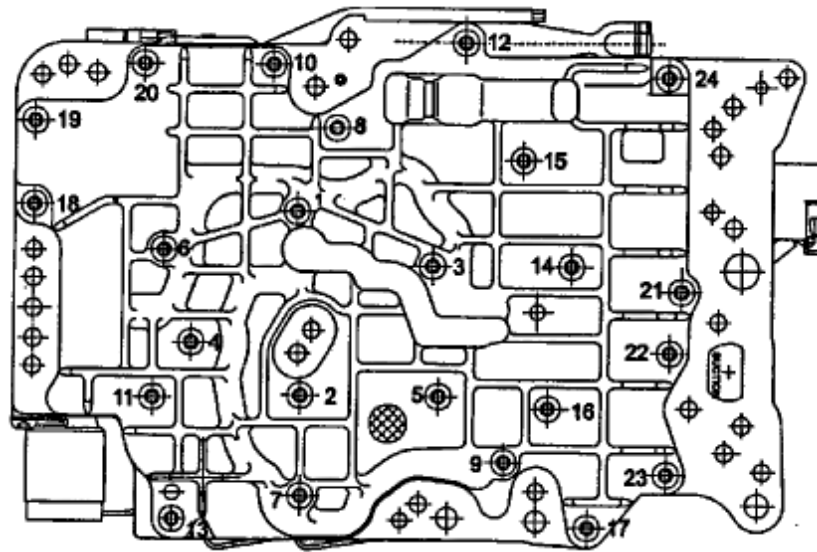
The tighten sequence of valve bolt from upper to lower
